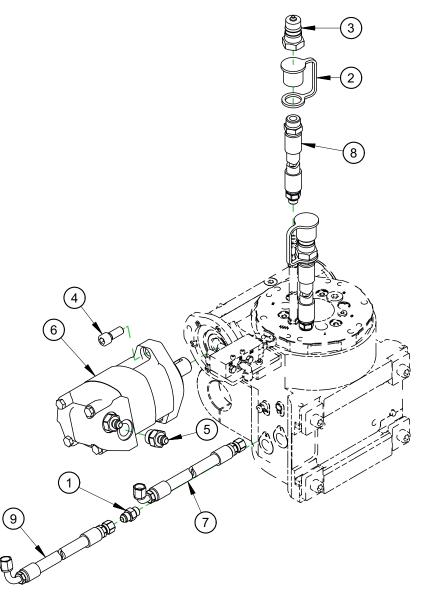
OD MOUNT CLAMP KIT (P/N 80622)
